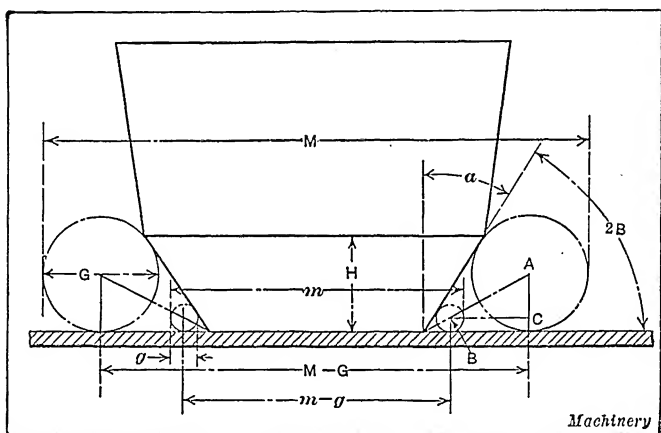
Wire Method employed for checking Angle of Conical Surface
